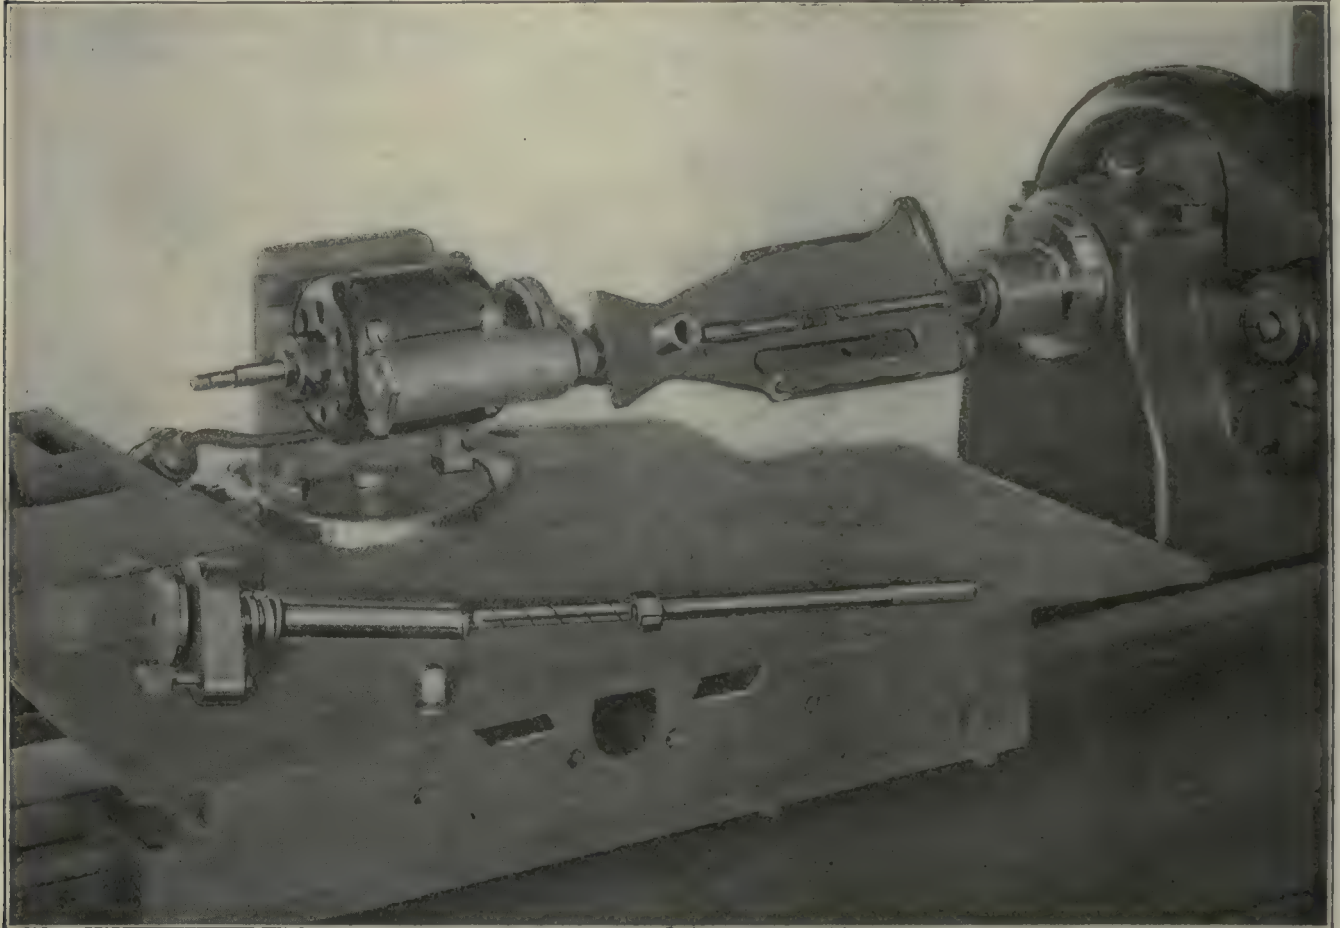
INTERNAL GRINDING IN FINISHING THE LOCKING SHOULDERS FOR THE BOLT
